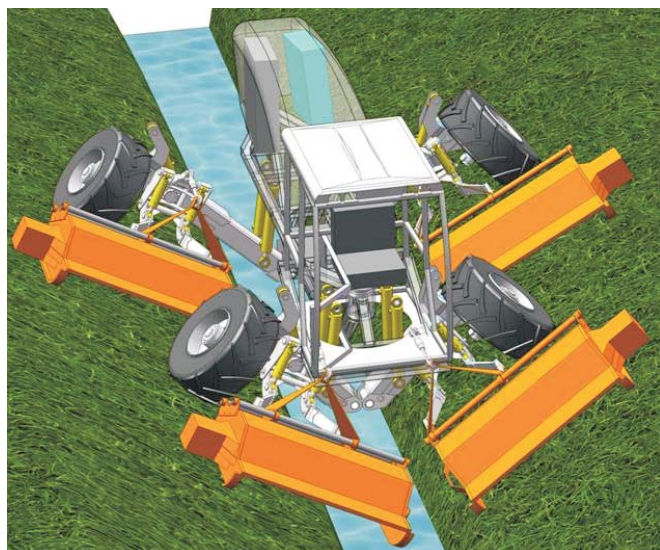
The version of machine with joint, central wheels and L-shaped arms
